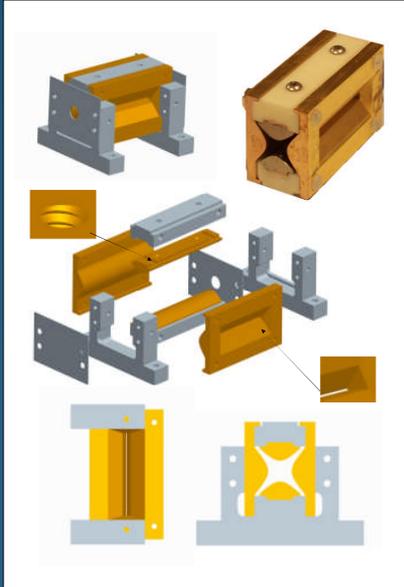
DLP LIT prototype with CAD model and exploded assembly.
